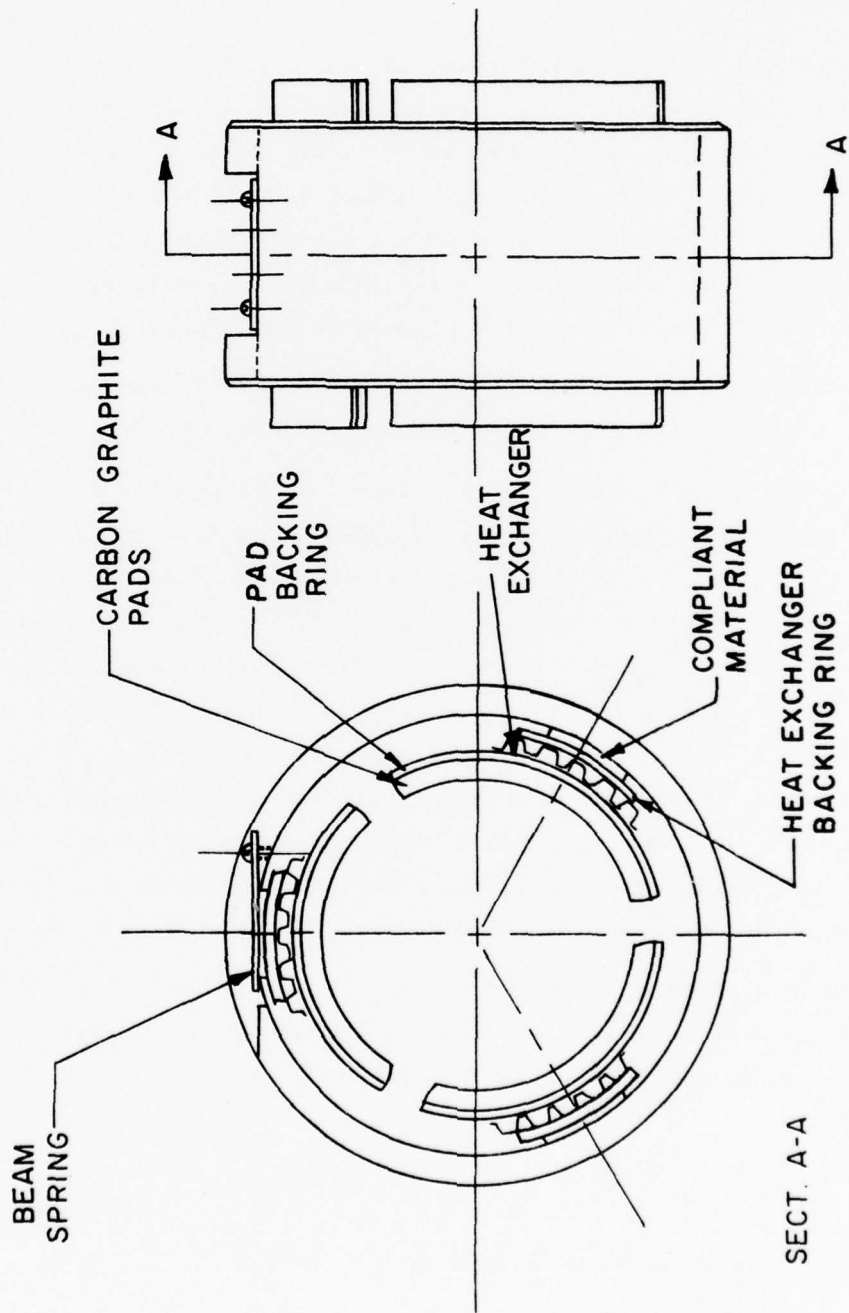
Spring-Mounted Compliant-Pivot Journal Bearing
